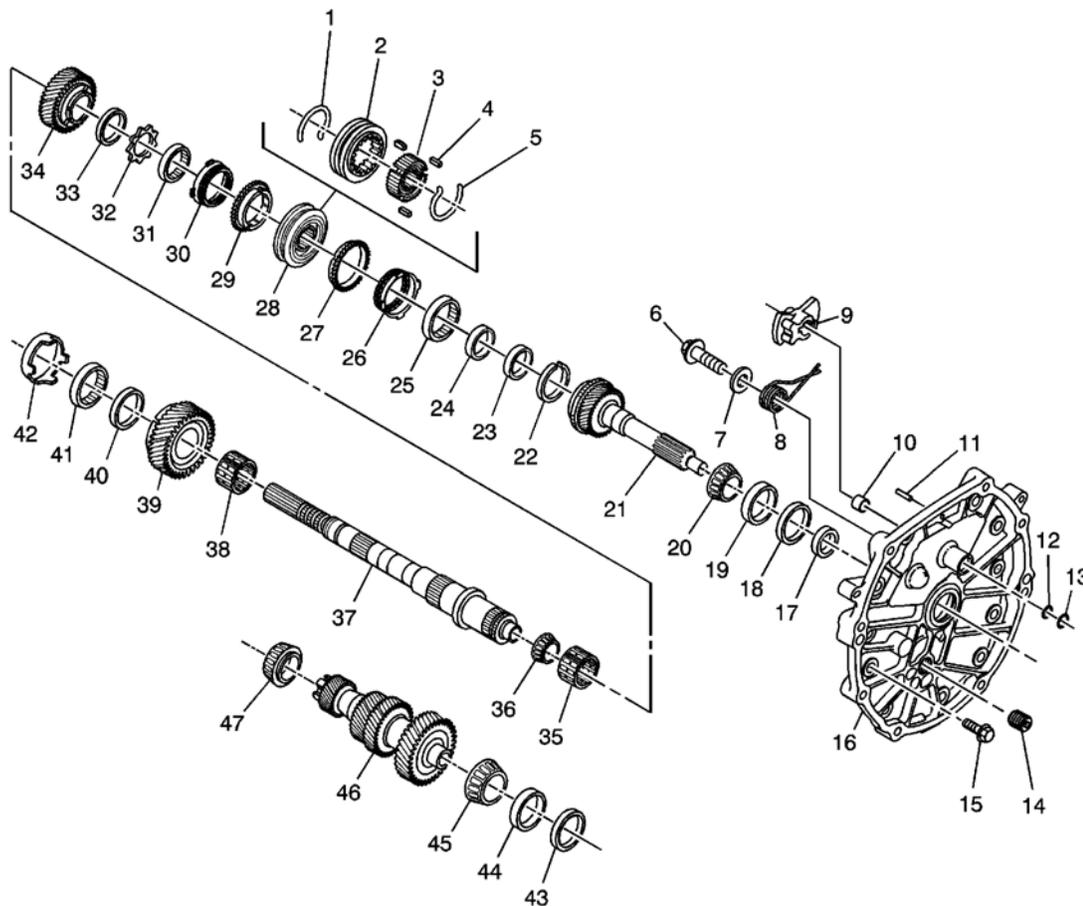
Adapter Plate and Gears Component Location (Y Car)
